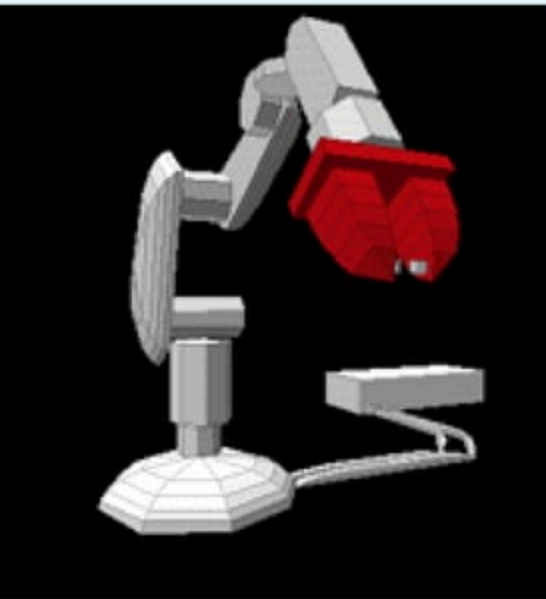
This robot has been designed expressly for use in precise path-oriented tasks such as deburring, milling, sanding, gluing, bonding, cutting, and assembly. (Reis Machines, Inc.)
